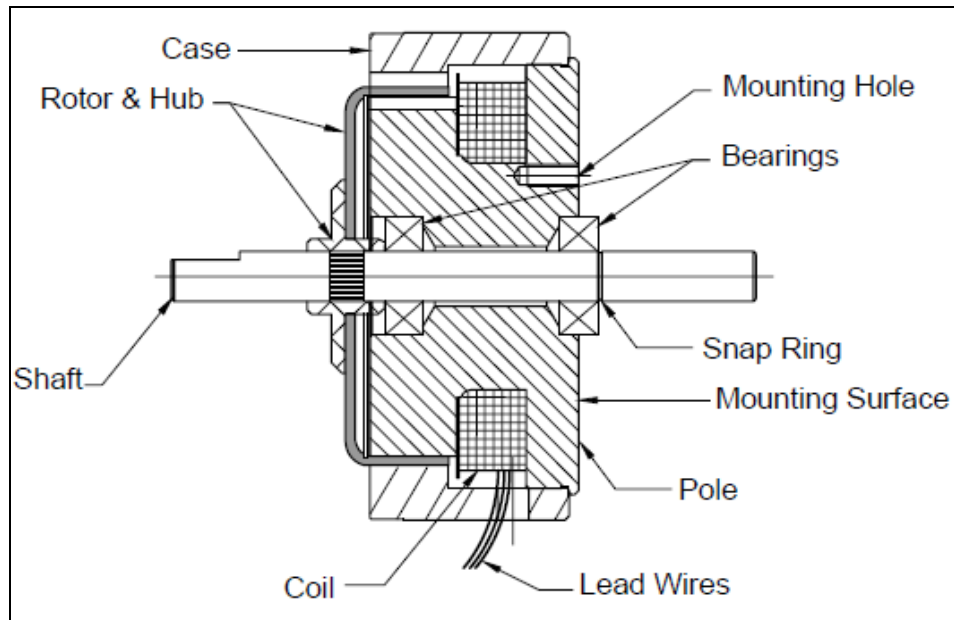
Cross sectional view of the Magtrol hysteresis brake [94].
